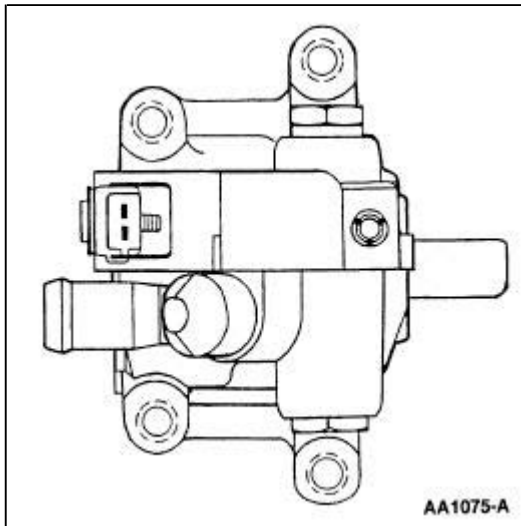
Hydraulic Cooling Fan Pump with Integral Solenoid
